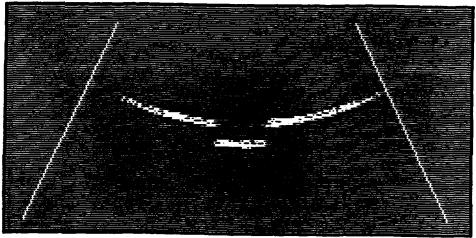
The principle of structured lighting for weld bead and joint inspection [1]
